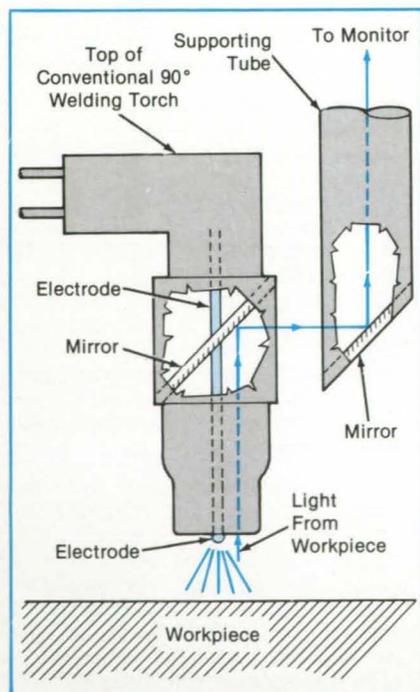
The Workpiece Is Viewed along the welding-torch axis with the help of a periscopelike arrangement of mirrors.
